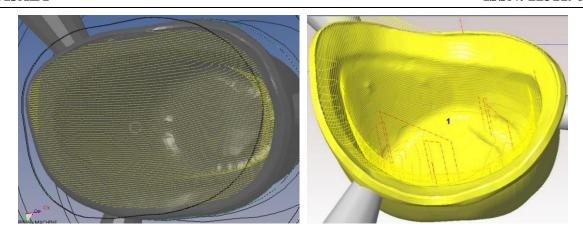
Tool path strategies: (A) Raster and (B) 3D Offset.
